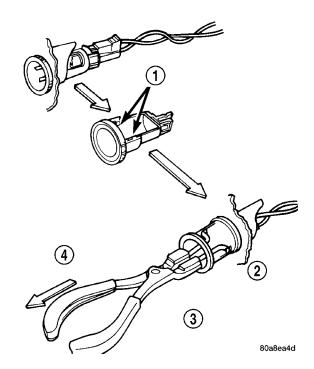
Cigar Lighter/Power Outlet Base Removal
